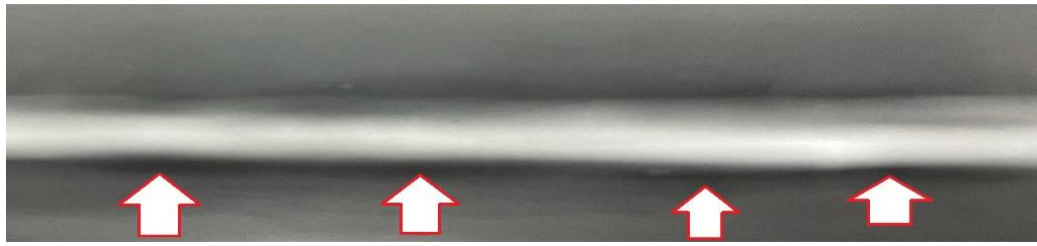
Welding defects (cracks) and incompatibilities after classic MAG welding without micro-jet cooling.
